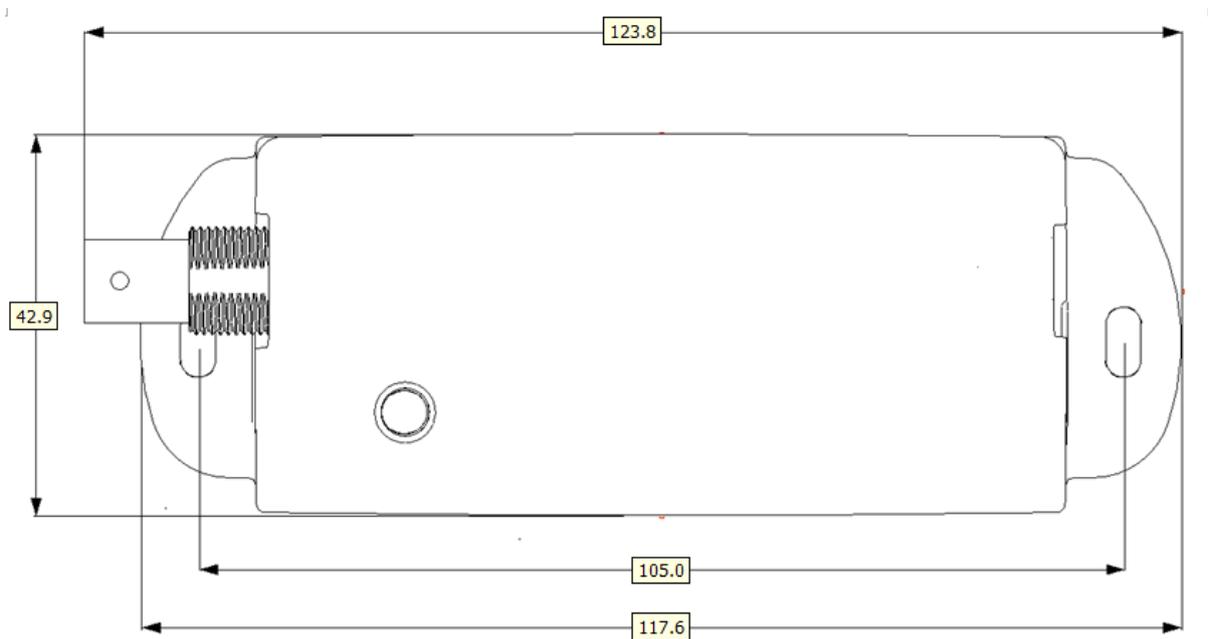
Modbus Dissolved Oxygen Sensor Adapter Dimension – Top View
